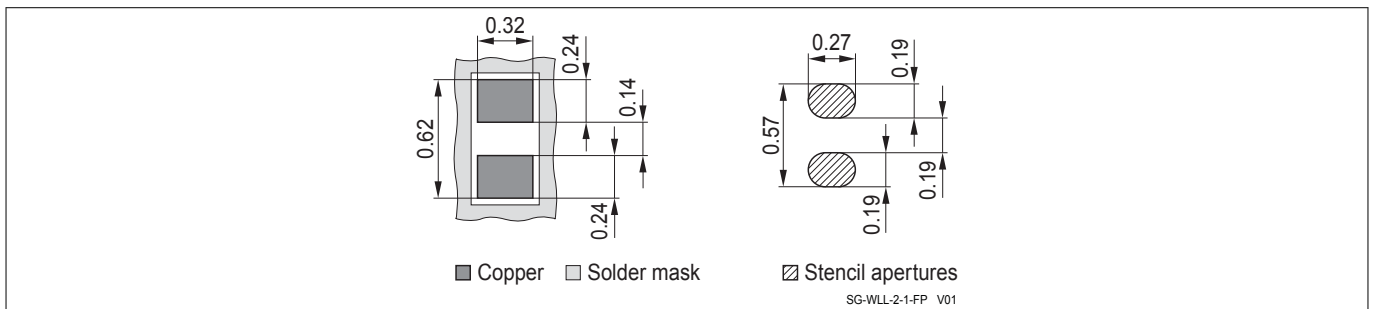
WLL-2-1 footprint (recommendation for printed circuit board assembly see [2])
